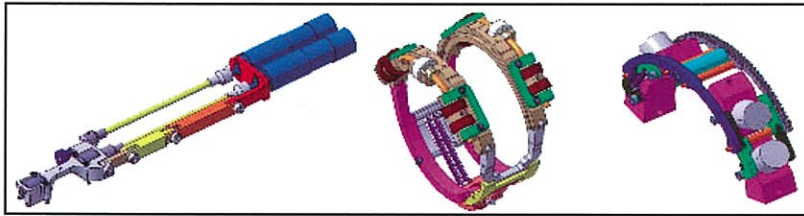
Motor Assembly; Frame Assembly; Scan Assembly.
